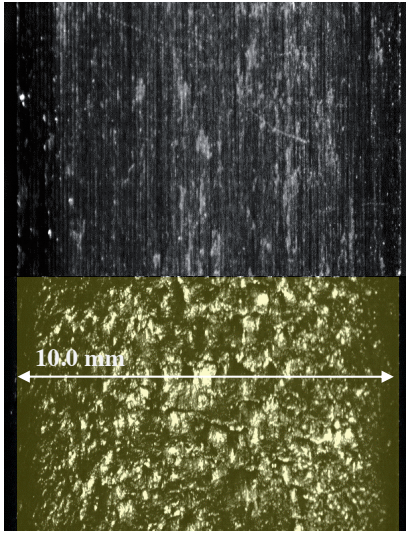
Wheel contact surfaces before and after the first 200,000 cycles for test C
